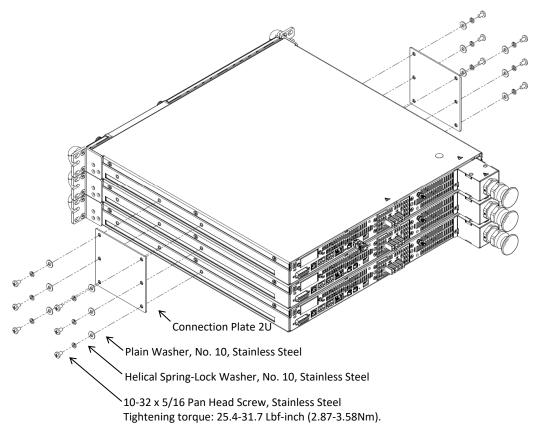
Three 150V-600V Units Connection Plates 2U Assembly
